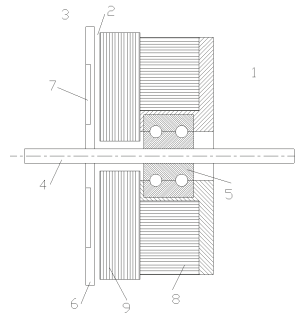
Structure of the motor patented by Gerling and Lürkens (1997). The AFIM has a stator 1 and a rotor 3 displaced by a radial air-gap 2, the rotor of which is mounted on a shaft 4, which is supported by means of a bearing 5. The rotor 3 is made of two materials, i.e., an electrically conductive material 6 (aluminium) and a high-permeability material 7 (iron). The high-permeability material 7 has a higher specific gravity than the electrically highly conductive material 6, is given an annular ring shape, and is embedded in the rotor 3 in such a way that only a layer of the electrically highly conductive material 6 is situated at the side facing the stator 1. The stator 1 has an iron sleeve 8 formed by coiling and electric-sheet band and provided with slots for receiving a winding 9 (Gerling and Lürkens, 1997).
